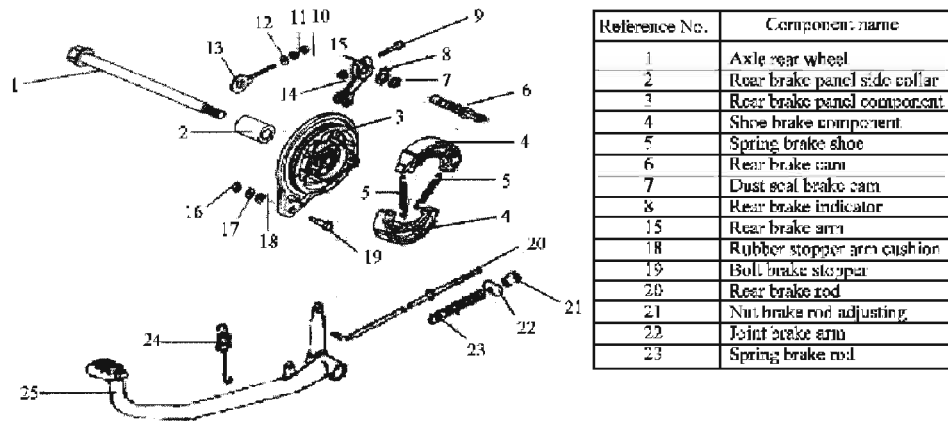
An exploded view and component listing of motorcycle drum brake assembly
